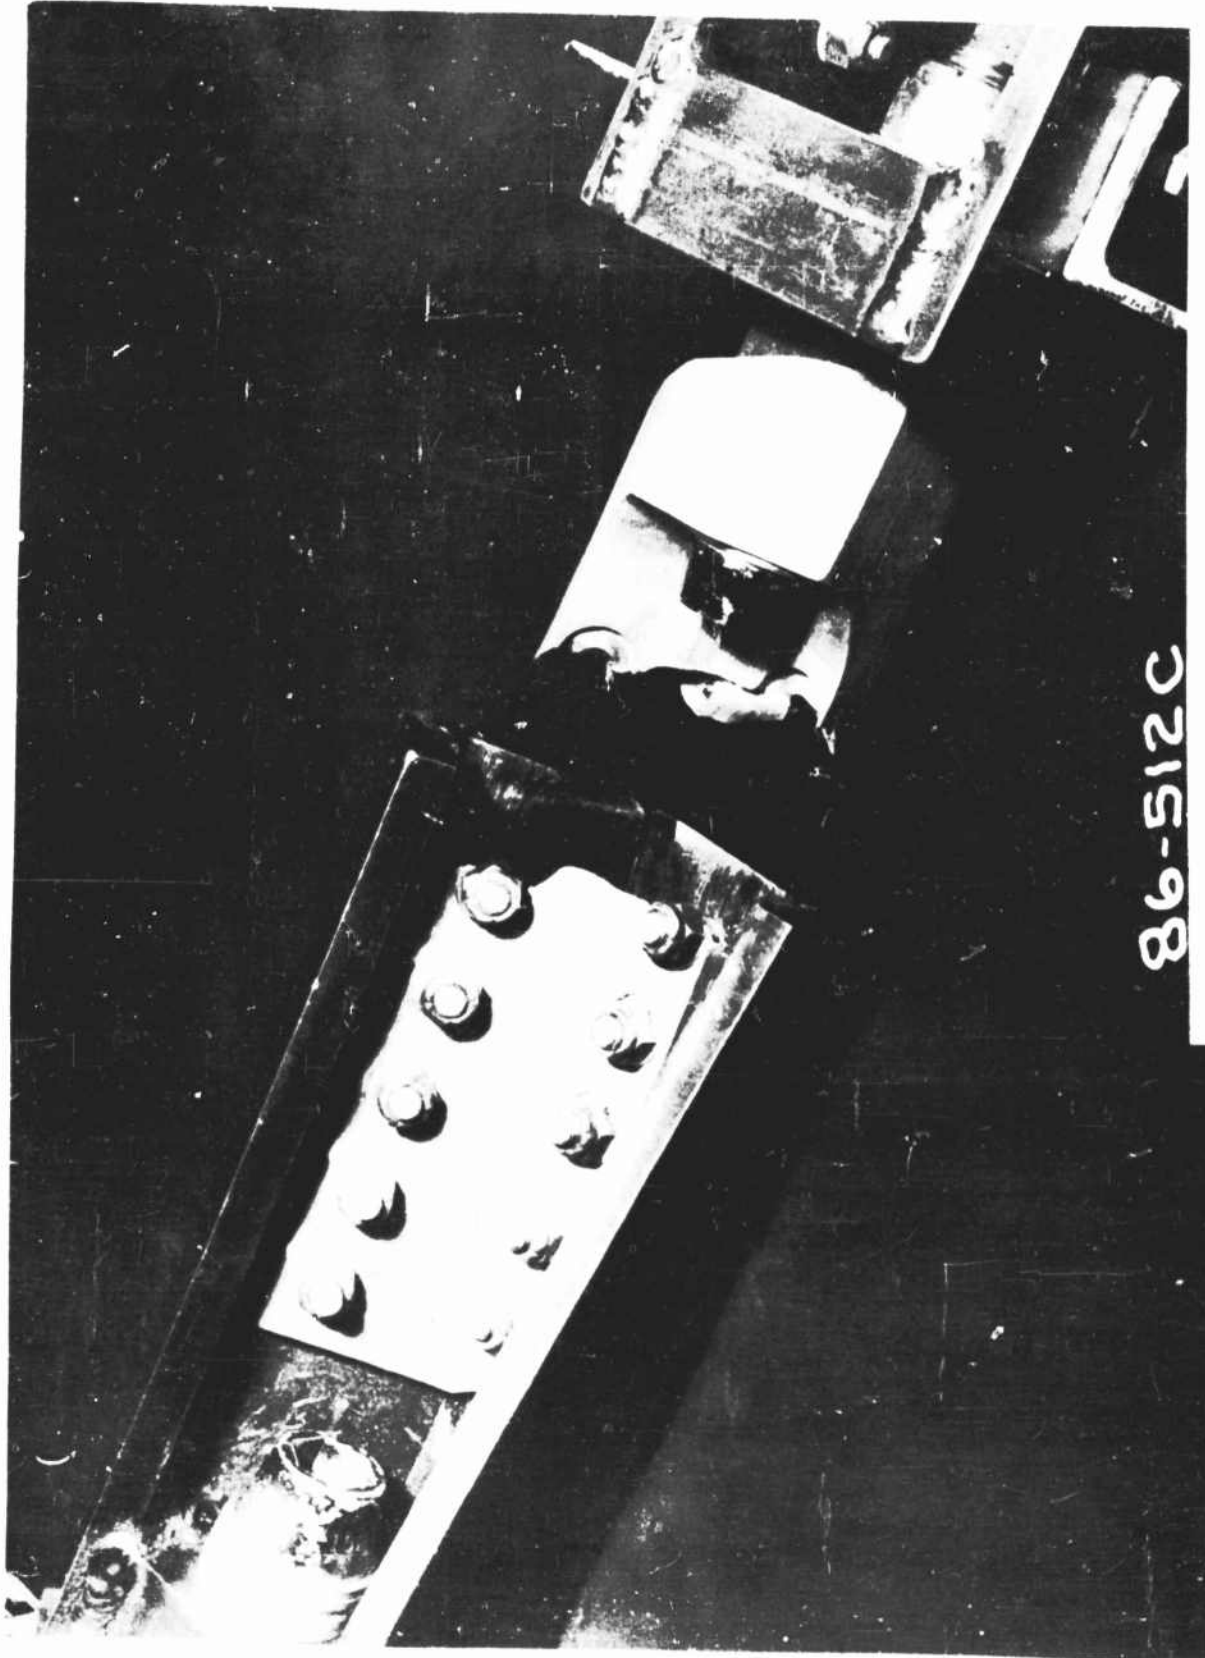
BASE SECTION LONGERON LAMINATE PLATING AREA
